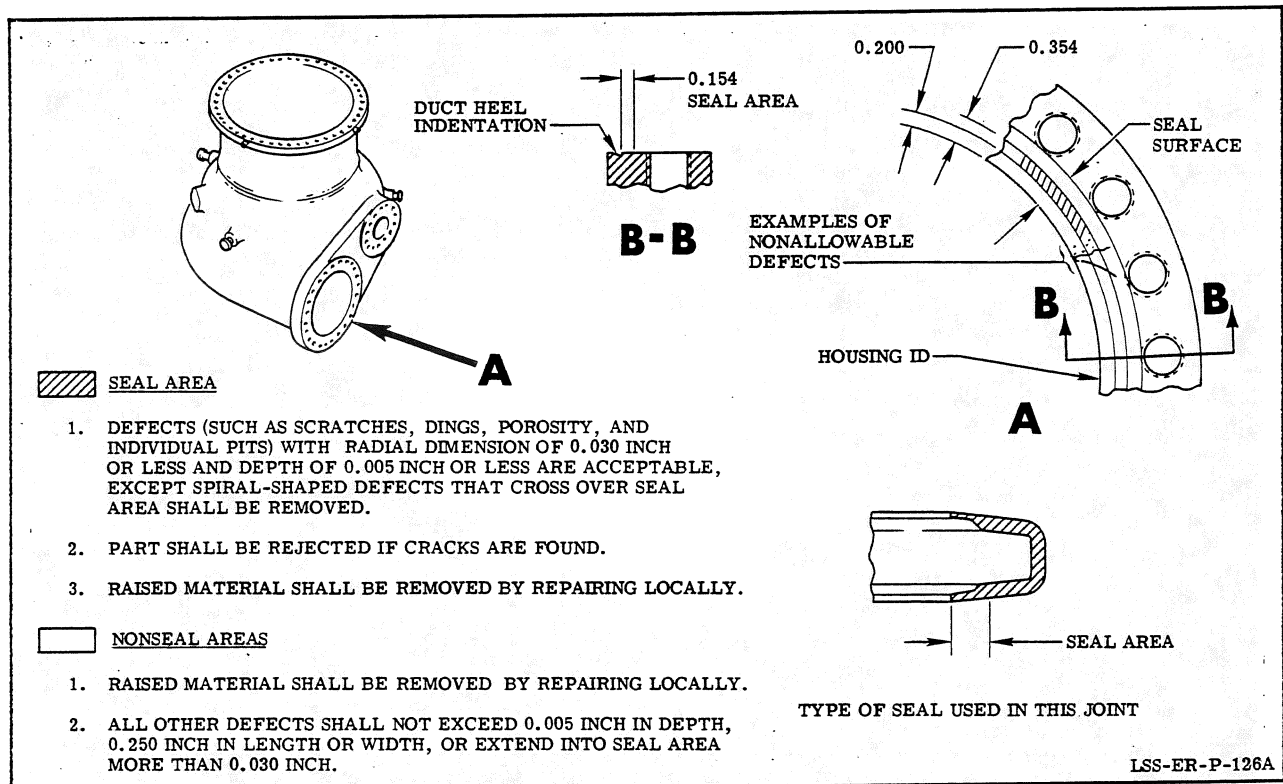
LPOTP Housing Discharge Flange Seal Surface Inspection Guide When Using Seal RS008862-005 (Joint 02)
